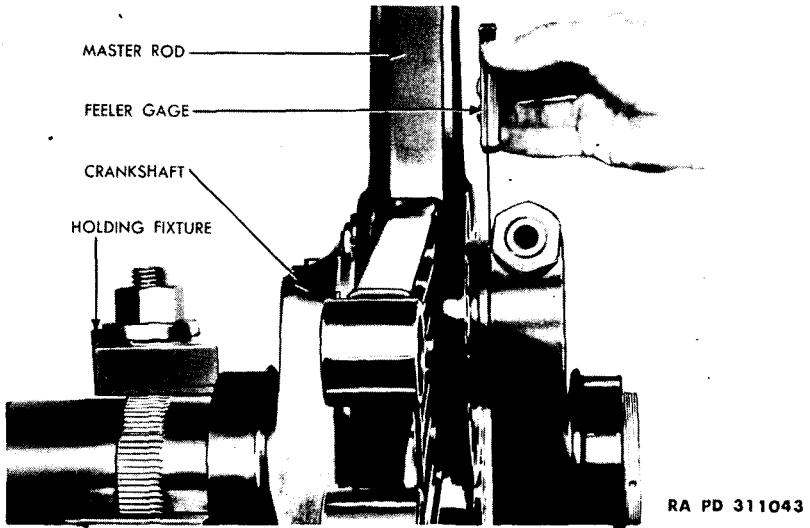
Checking Master Rod Side Clearance, Using Holding Fixture 5A2296
